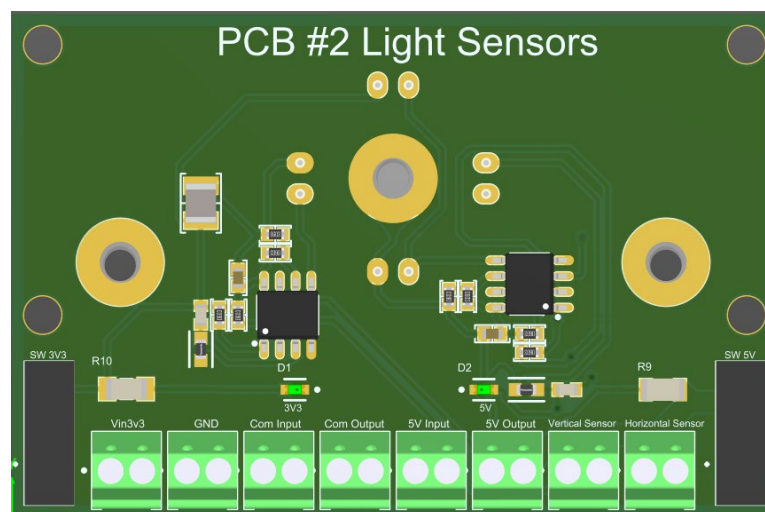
Light Sensor PCB#2 3D view (front)
